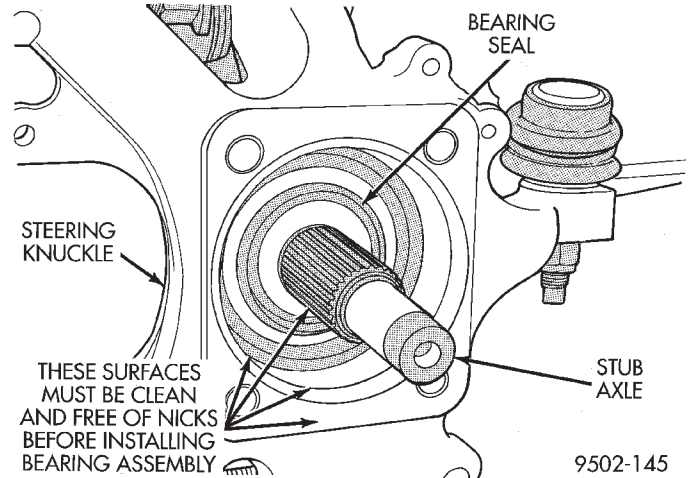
Hub And Bearing Assembly Mounting Surfaces
